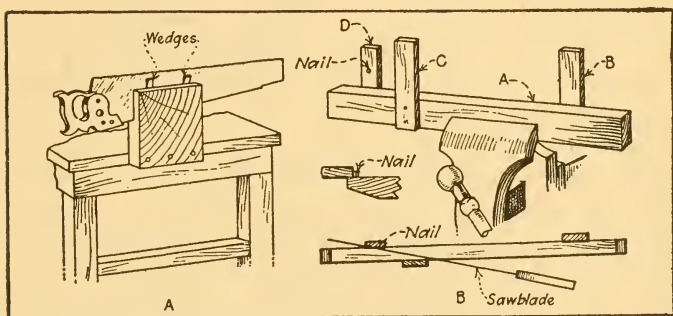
Simple Saw Clamp at A. B—Gauge for Sawing Trestle Legs.
